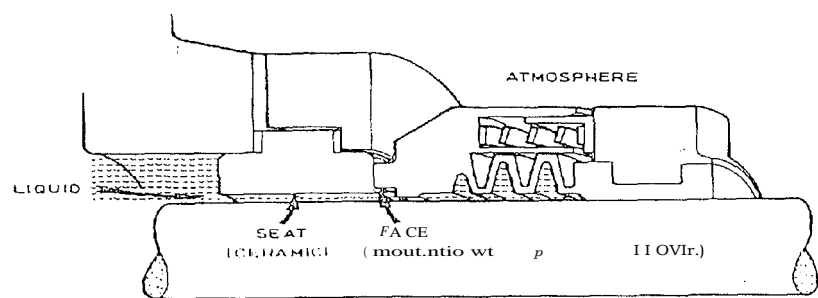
Externally Mounted Seal for Corrosive Liquid Sealing Purpose. (Crane1997).
